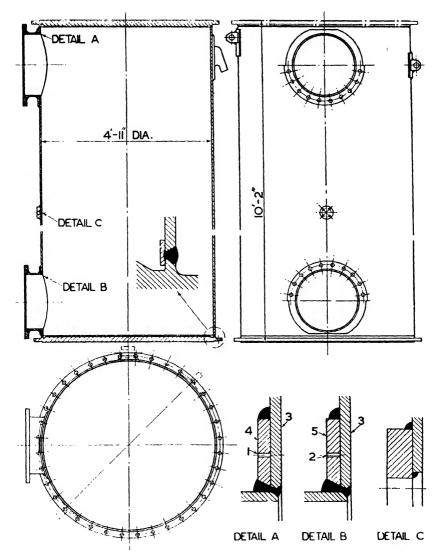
Shell of a Cooler for Compressor Plant (Continental design)
